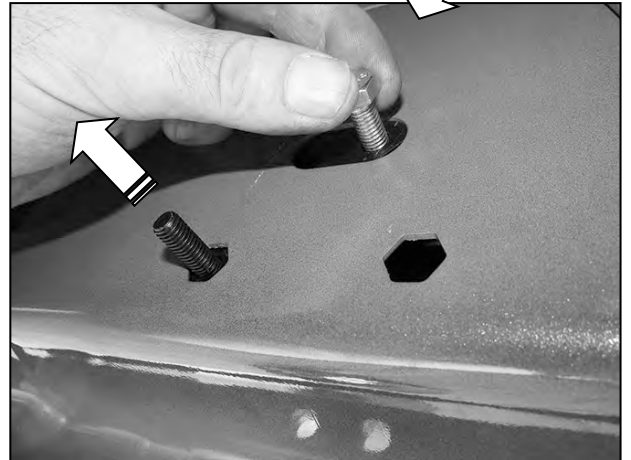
8mm Bolt-8mm Nut Plate, NOTE: 8mm Bolt-Nut Plate is not required on models with threaded inserts
